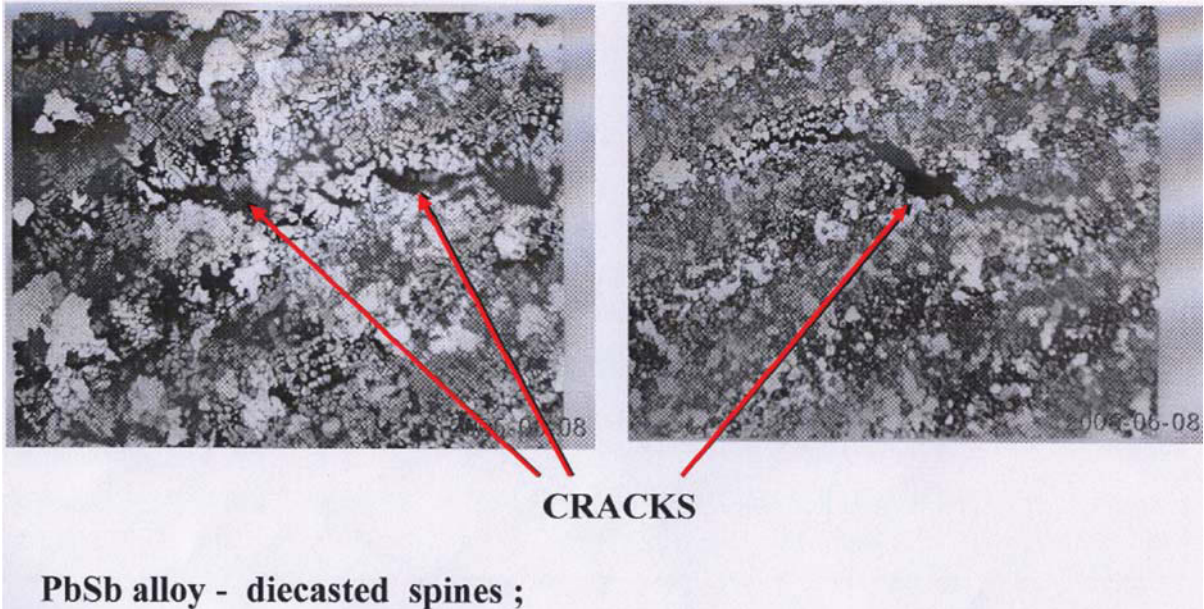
Cracks in the lead-antimony die-casted spines [5]
